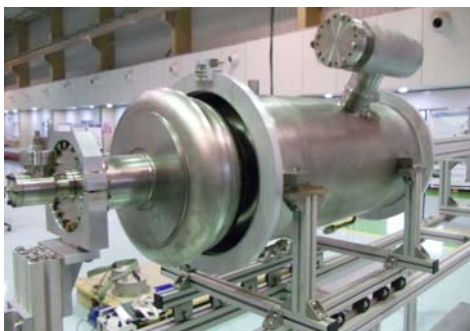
An insertion fixture for assembly of bare cavity and helium vessel.
